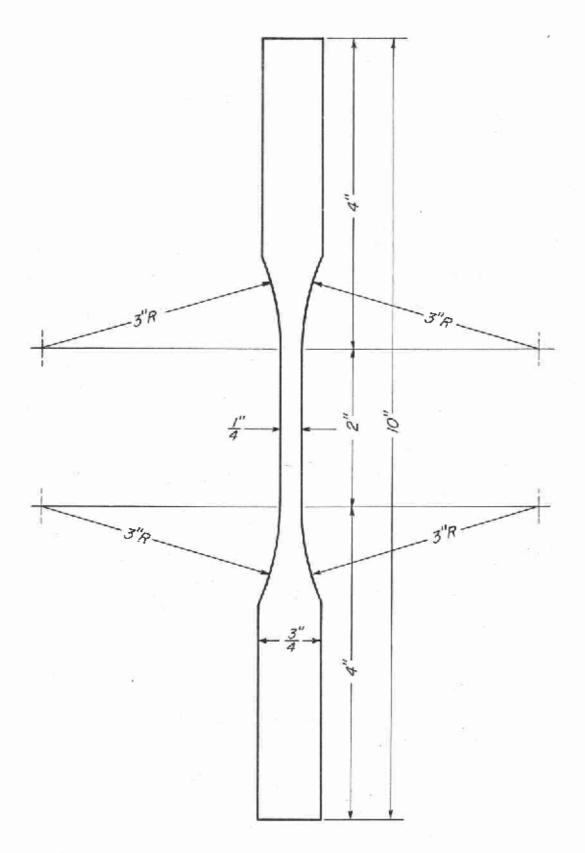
Dimensions of specimens cut from sheets of cured adhesives.
